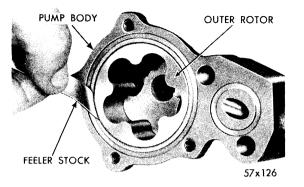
Measuring Clearance between Outer Rotor and Oil Pump Body
